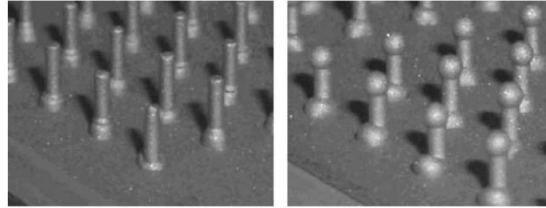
Cylindrical and ball-shaped pins manufactured using CMT by Ucsnik *et al.* [11].
